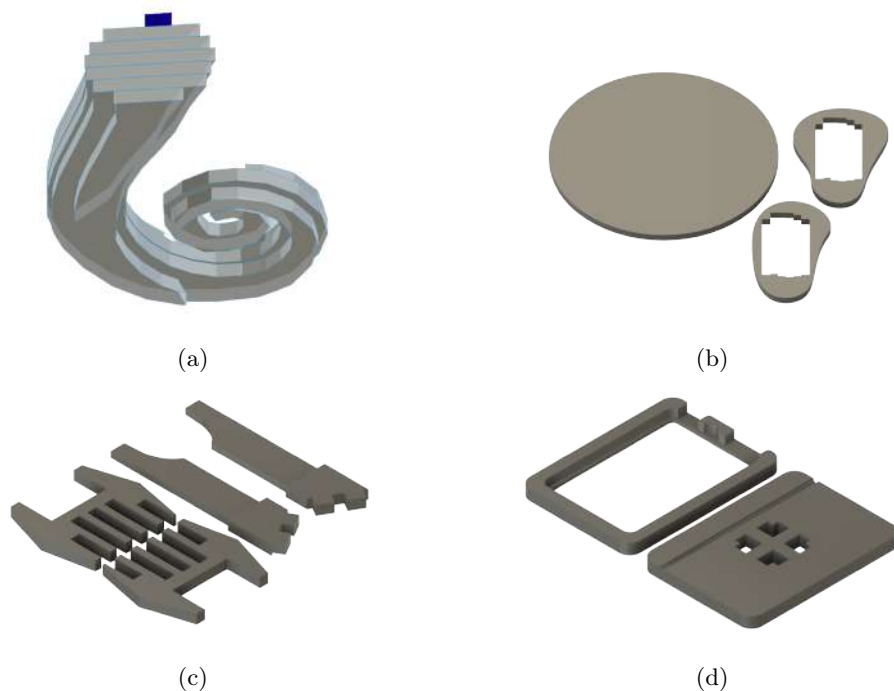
(a) 3D model of the tail after slicing, (b) base of the Kiosk, (c) joints for the top and tail of the seahorse and connectors of tablet holder to Kiosk and (d) tablet holder
